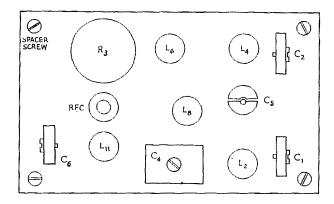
This sketch shows approximate placement of components on the reverse side of the board shown in Fig. 3.
